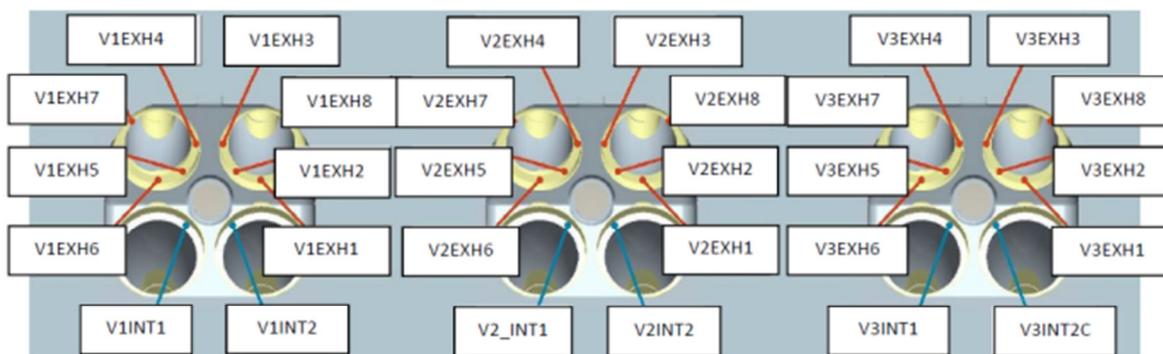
Identification of all measuring points and their position on the circumference of the valve seats in each cylinder.
